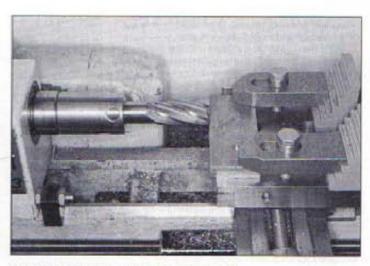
If the diameter marked \* is a good fit in the holder and it is concentric with the hin, hole, all will be well. It is just a matter of machining the reamed hole and the diameter on the same setting. The 5mm hole for the locking spigot of the long locking screw was drilled using the same method as that shown in Photo. 6, but simpler because the adapter was screwed to the cross slide directly with a 6mm bolt as shown in the photo, once again with a bit of packing to get the height right. I used an old bolt because it would be drilled into.
